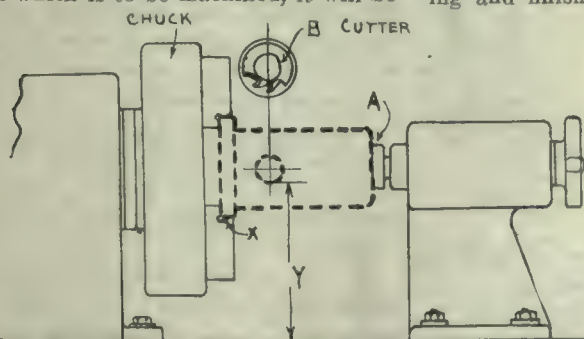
HOLDING THE WORK BY FINISHED DIAMETER WHILE MILLING BOSSES.
